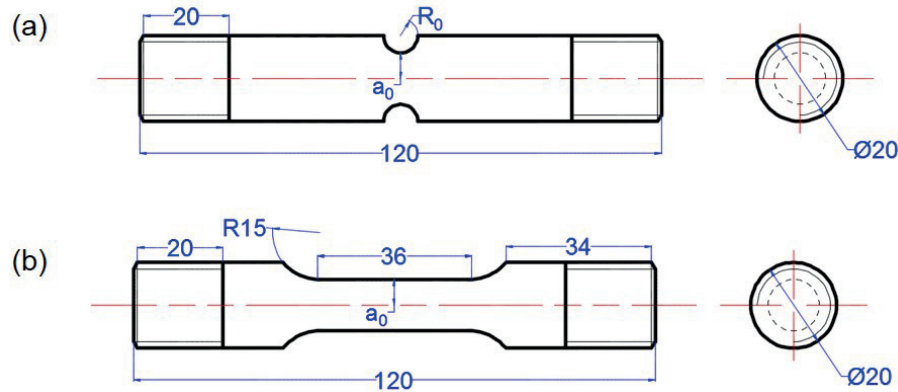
Sketches of tensile specimens: (a) Axisymmetric notched specimens; (b) Smooth round bar specimens.
